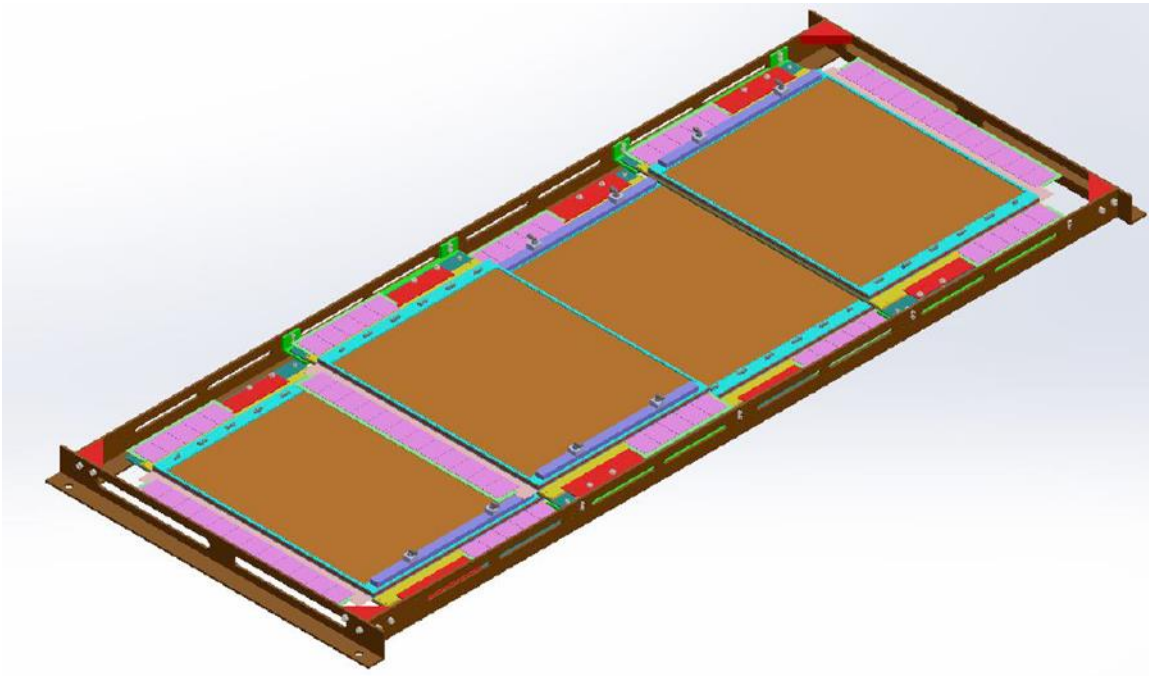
Drawing of the draft design of the chamber frame which holds four GEM modules.
